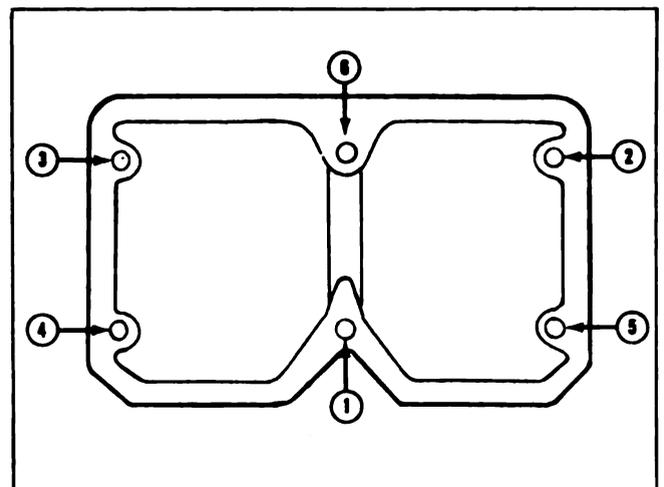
(N11463). The Tightening Sequence For The Rocker Lever Housing Capscrews.
